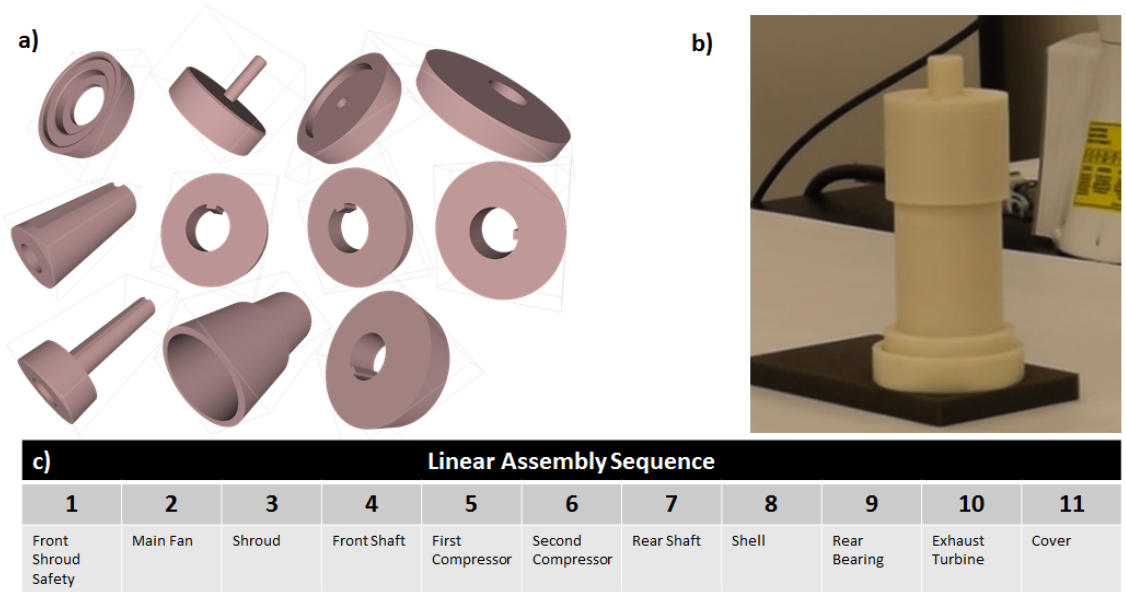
(a) Assembly CAD parts from a simplified Jet engine. (b) A simple jet engine assembly. (c) Feasible assembly sequence generated by the algorithm.
